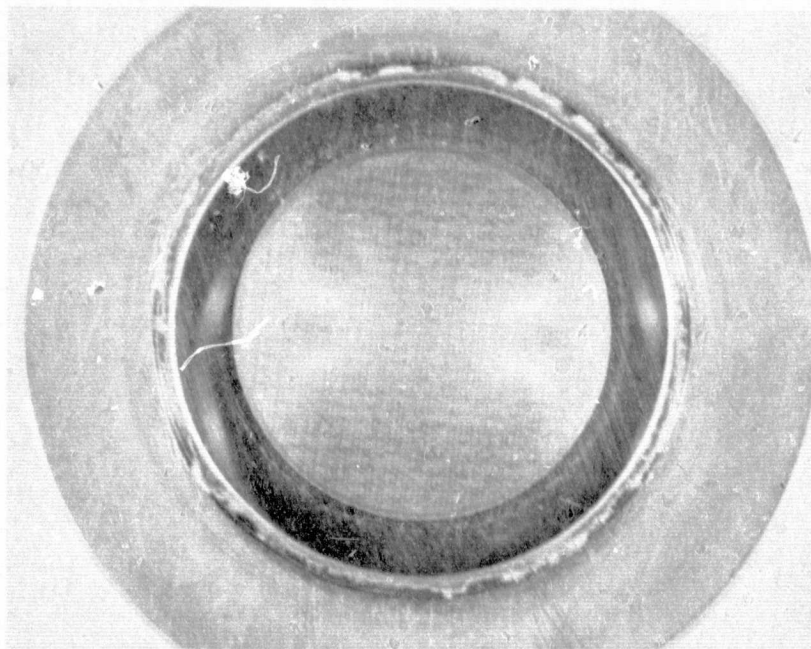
Load Bearing Ring Seal Face After Wear-in (2.5X)
